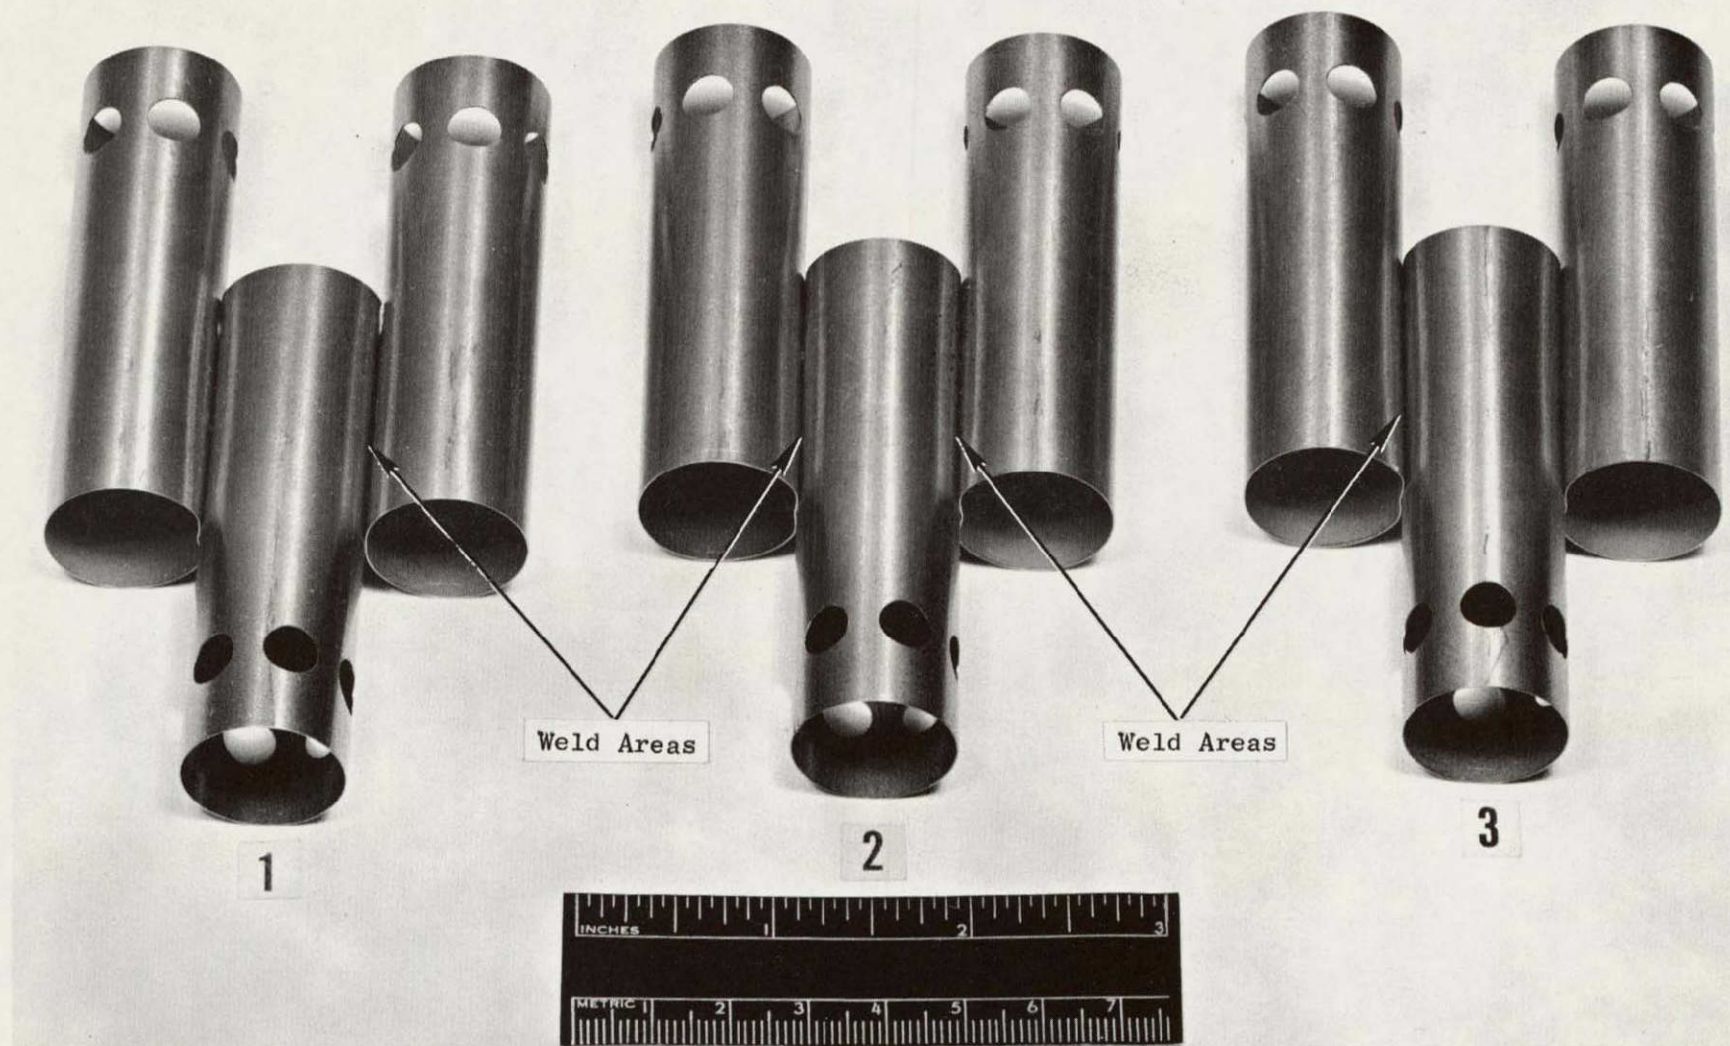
T-111 Tube-to-Tube GTA Weld Specimens for Mechanical Properties Testing - Before Test.
